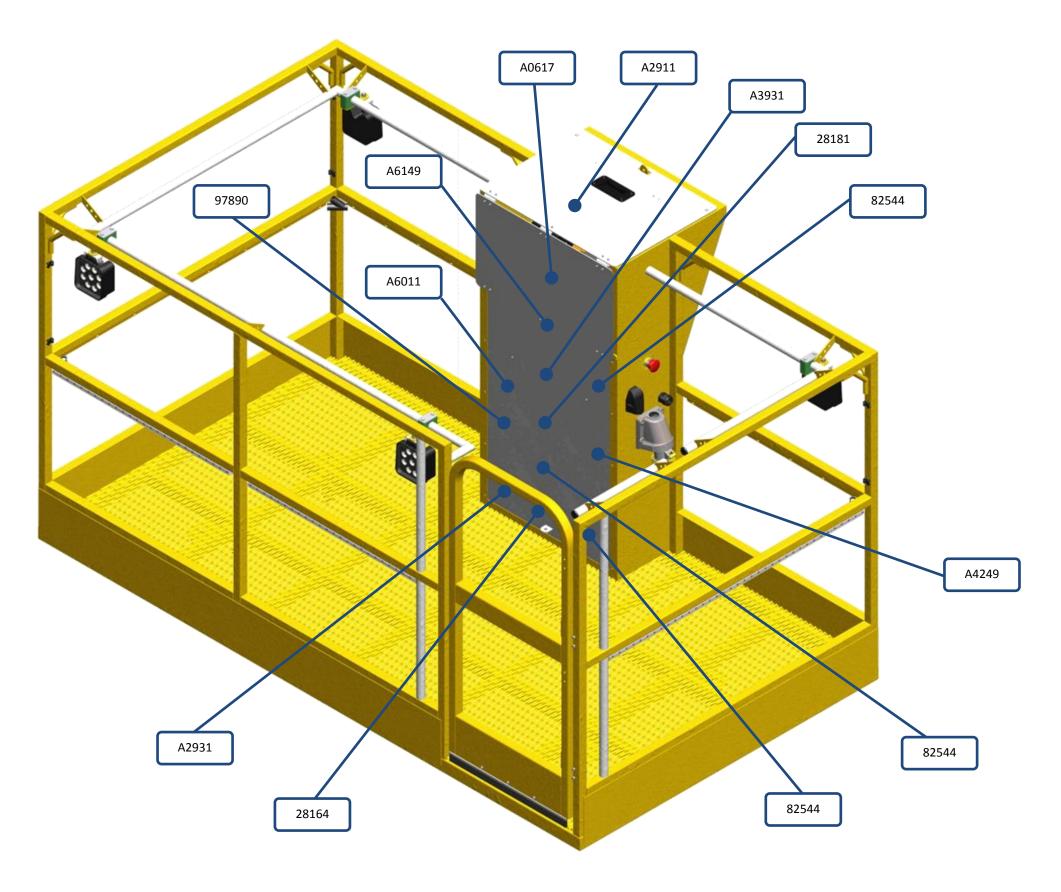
Platform - Front Offside Isometric View, Console Cover Closed
